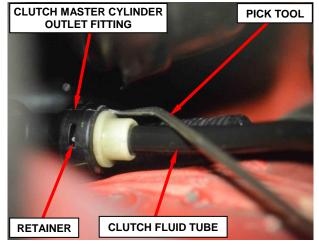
Clutch Fluid Tube at Clutch Master Cylinder Outlet Fitting
